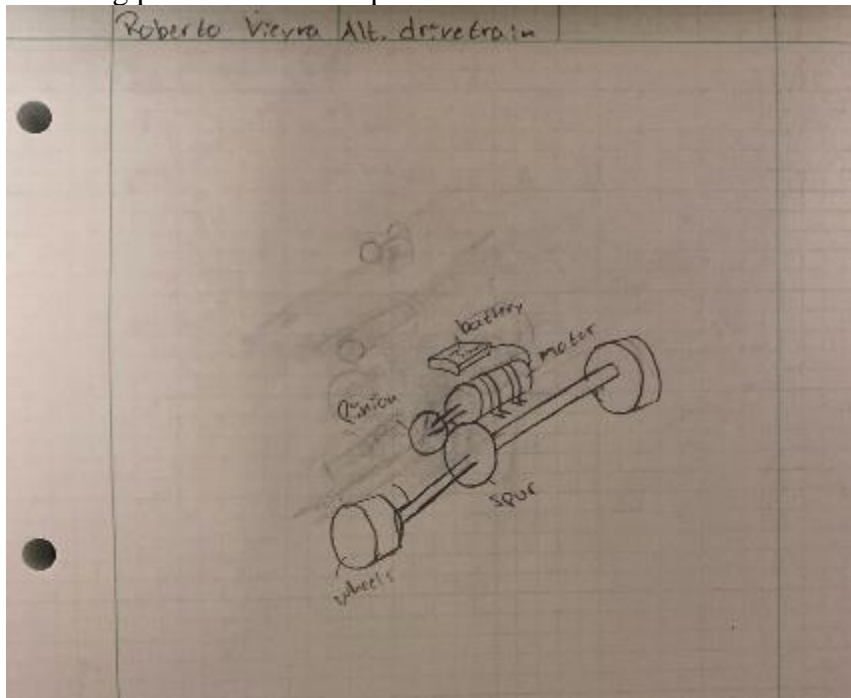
This is an image of the current drivetrain configuration. The motor is mounted to the chassis and attached to the battery. There are also two gears, one connected to the motor shaft and the other connected to the rear axle.
